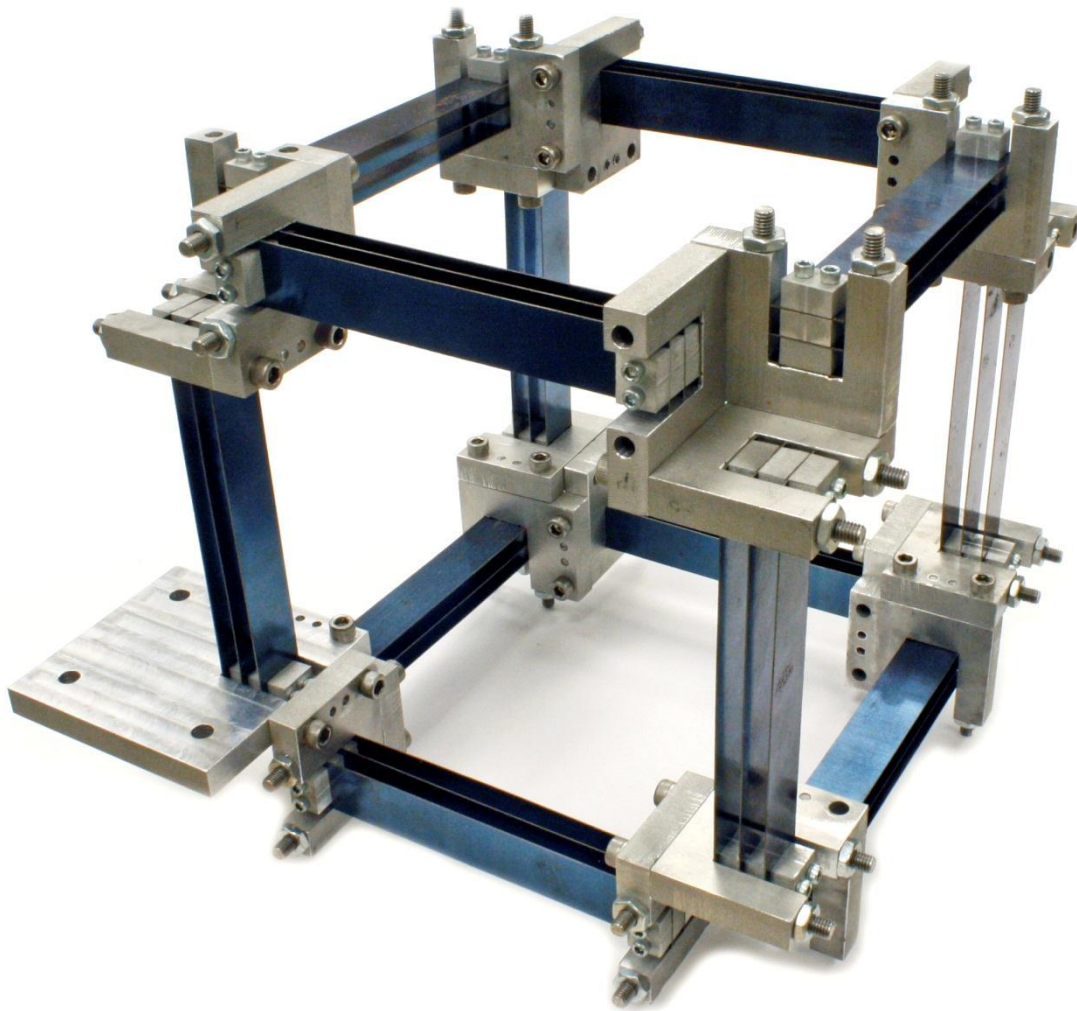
First XYZ Flexure Mechanism Prototype Physical Assembly
